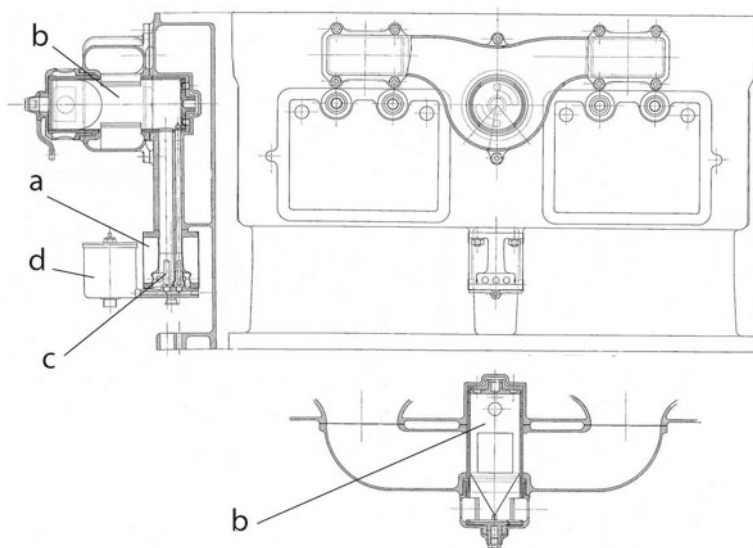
In jet carburetors the air and fuel mixture is built up by spraying gasoline in the air stream. Air was sucked through an intake and a regulation valve close to the intake manifold (courtesy of FIAT)
